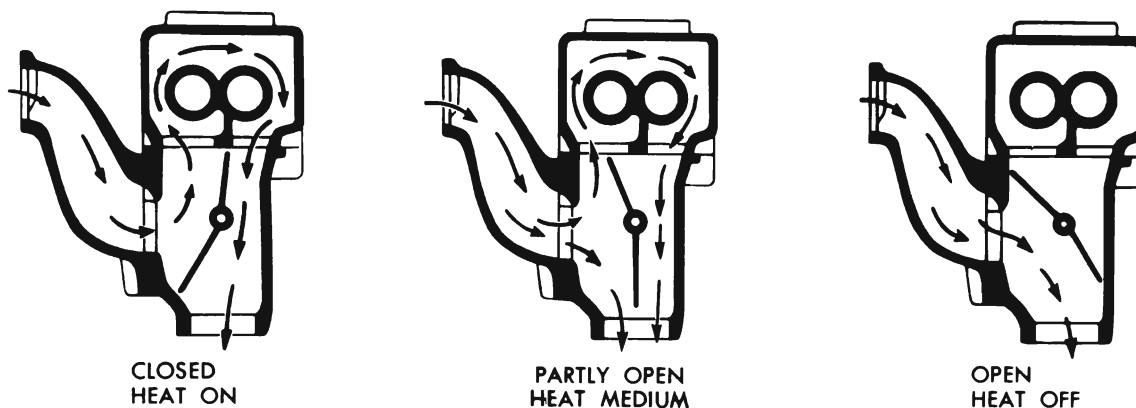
Exhaust Manifold Valve Operation—Sectional View
